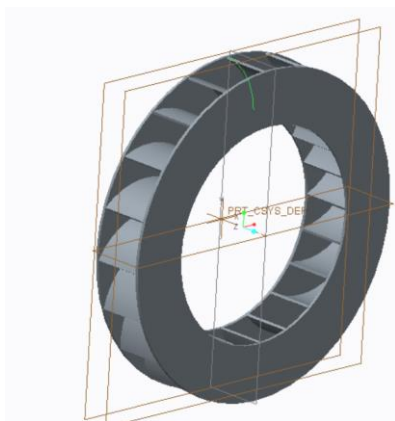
Final view of centrifugal impeller with backward curved blade
